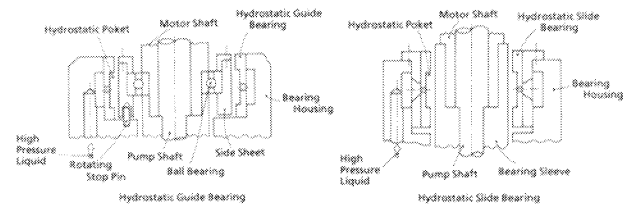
Hydrostatic Guide and Hydrostatic Slide Bearing.
